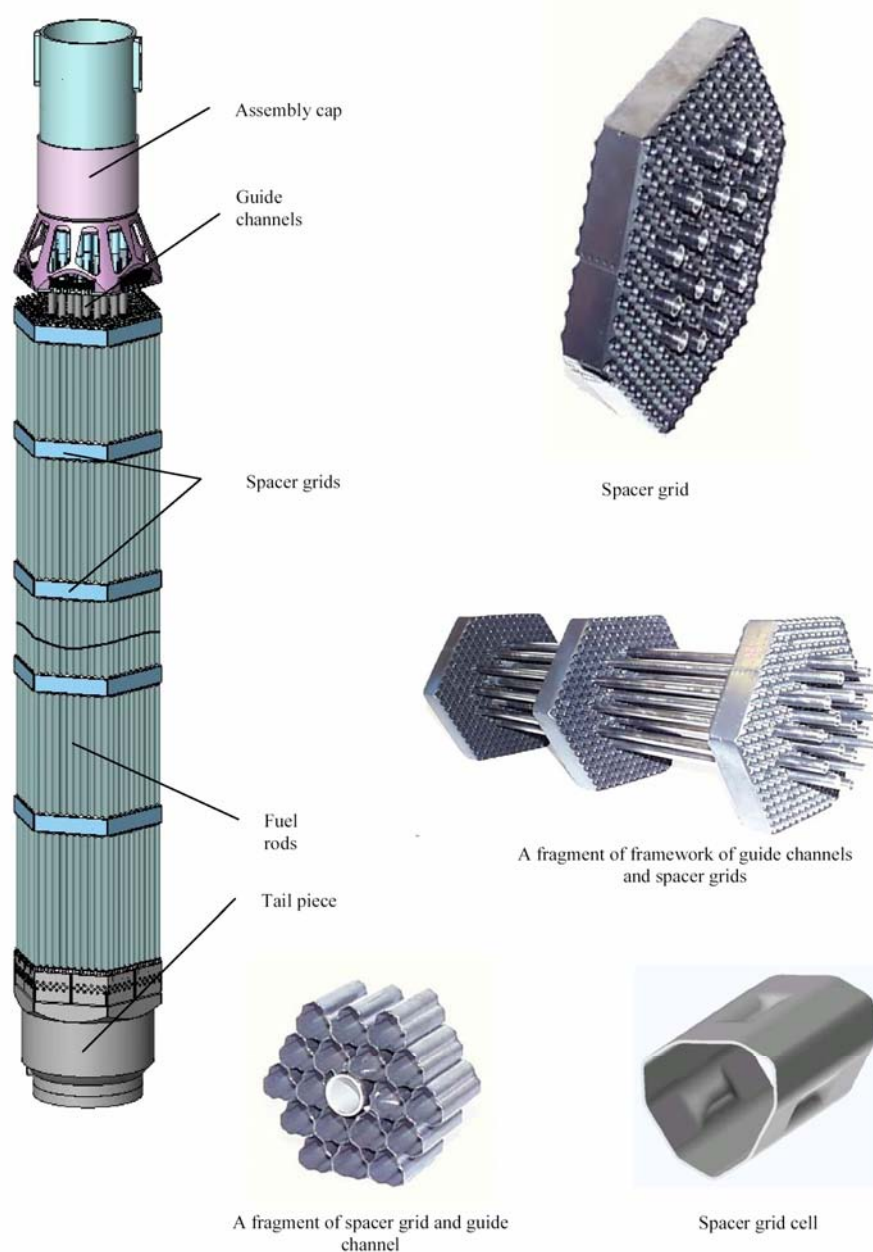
WWER-1000 fuel assembly and its components, Dragunov, et al., 2004.
